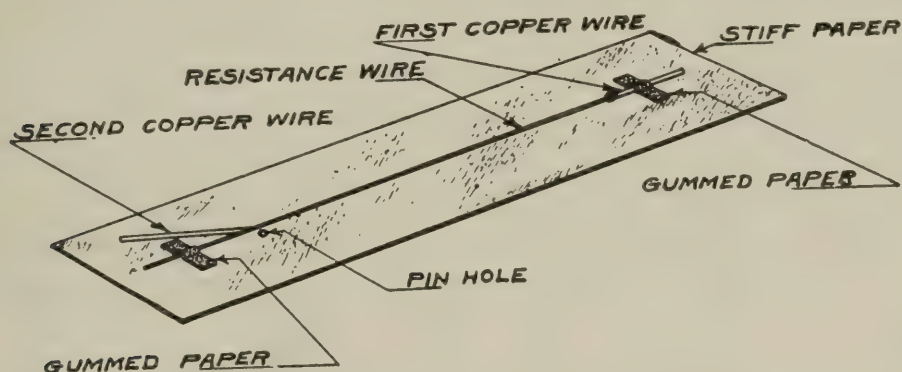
Method of Laying Off and Soldering Resistance Wire to Lead Wires.
